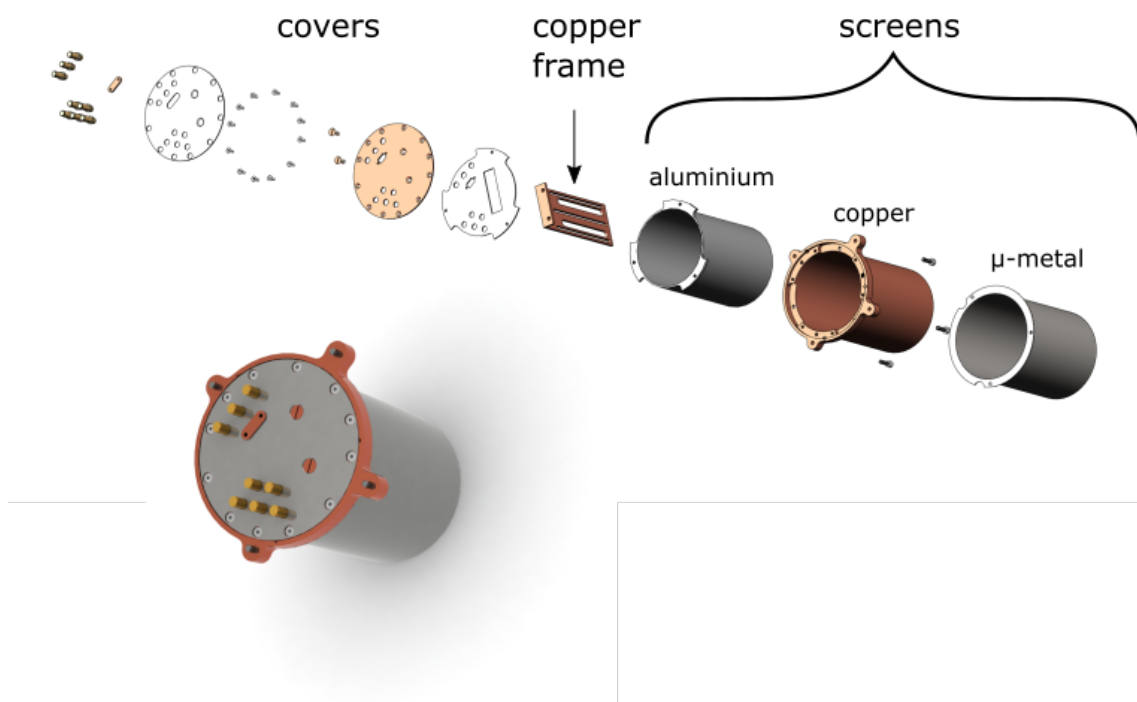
Electromagnetic shielding for SMPD. Exploded views of the microwave shields used in this experiment. The sample holder of SMPD is screwed on the copper frame. The figure is taken from [108].
